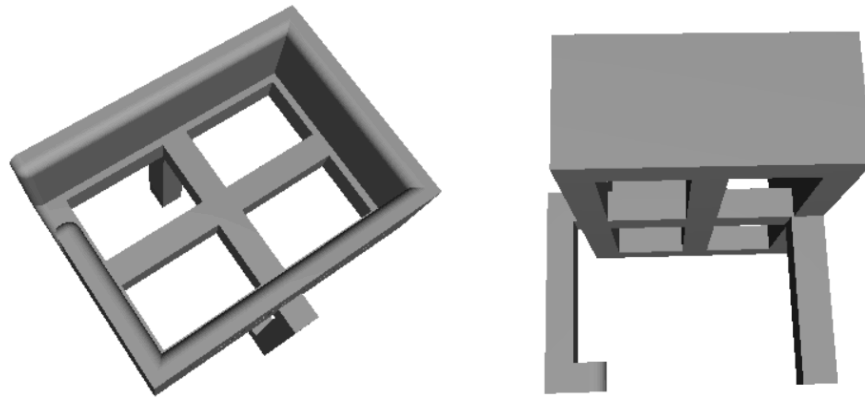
Two views of the battery holder. The L-shaped foot contains a M2 screw hole to attach to the board.
